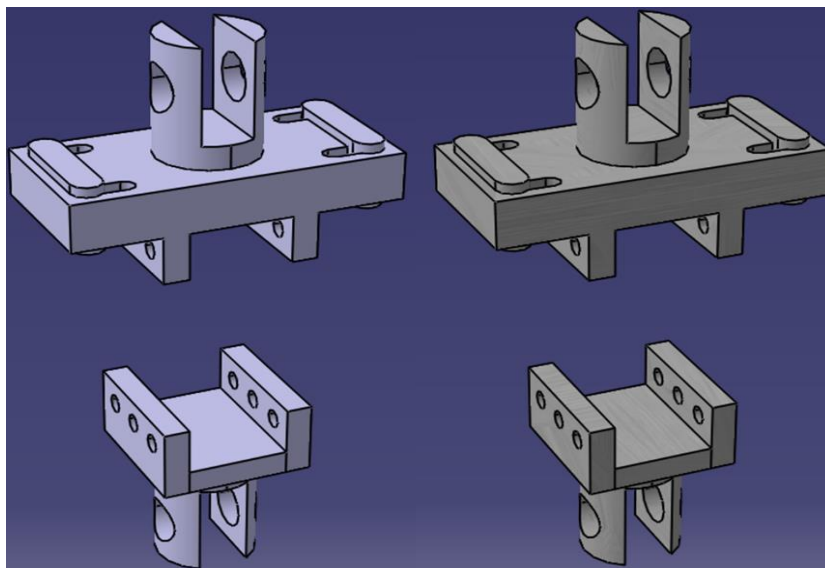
Design of the pre-crack rig CAD model Type D version 4
